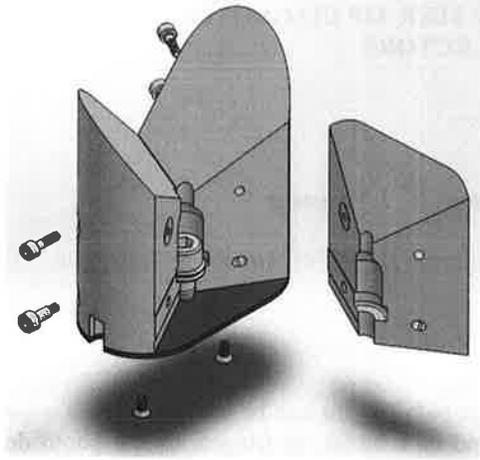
Model of the CCR, showing internal mounting details. (Ref. 3)
